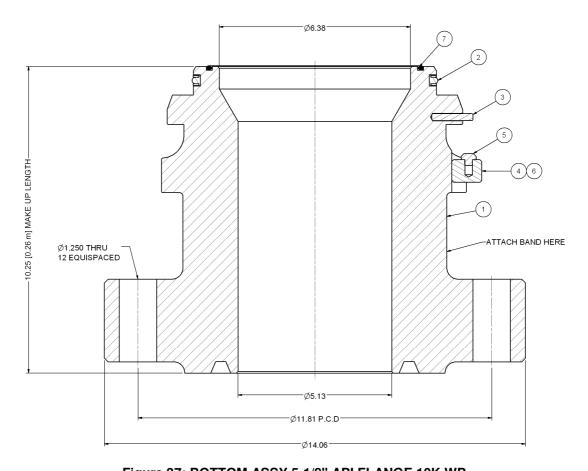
BOTTOM ASSY 5-1/8" API FLANGE 10K WP
